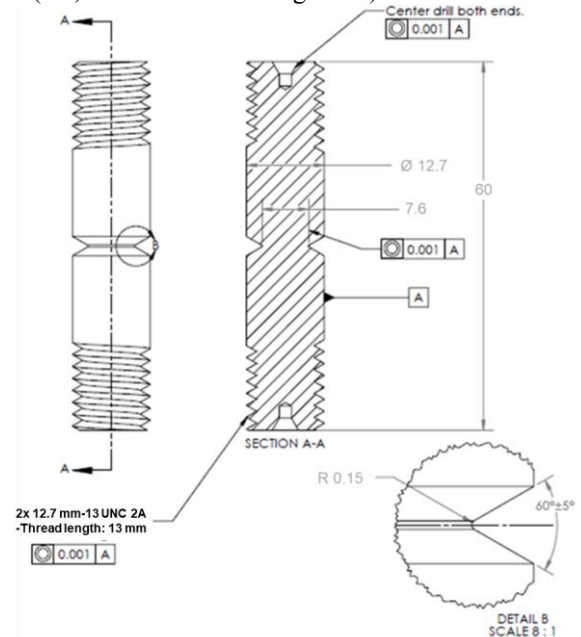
CIRCUMFERENTIALLY NOTCHED TENSILE (CNT) SPECIMEN GEOMETRY USED FOR CONDUCTING FATIGUE LIFE TEST. ALL DIMENSIONS ARE IN MM.
